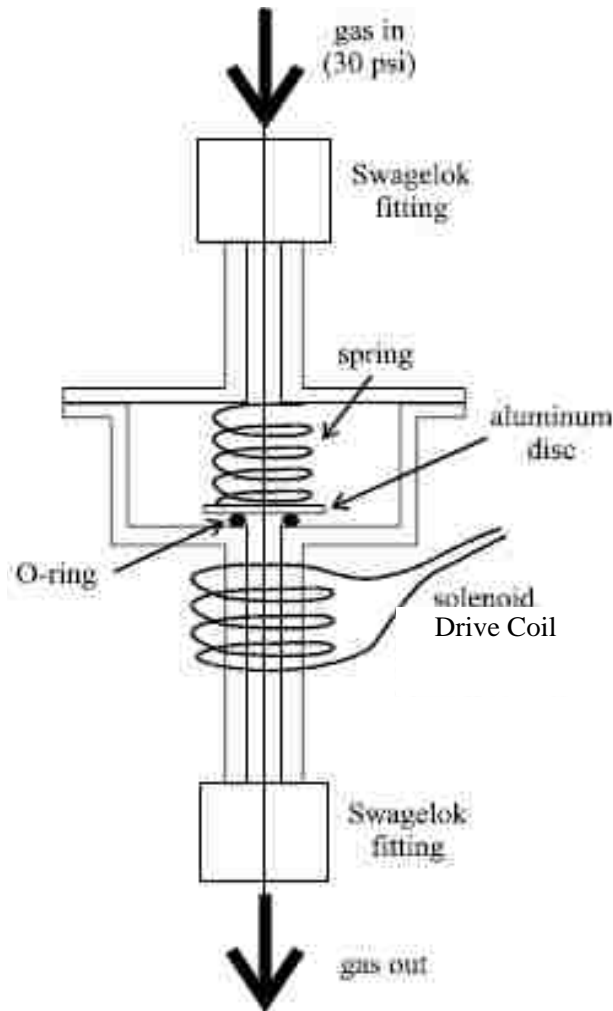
Schematic of the valve assembly: solenoidal driver coil, an aluminum disk working as valve piston, and spring used to ensure a positive seal. Picture is taken from [66].
